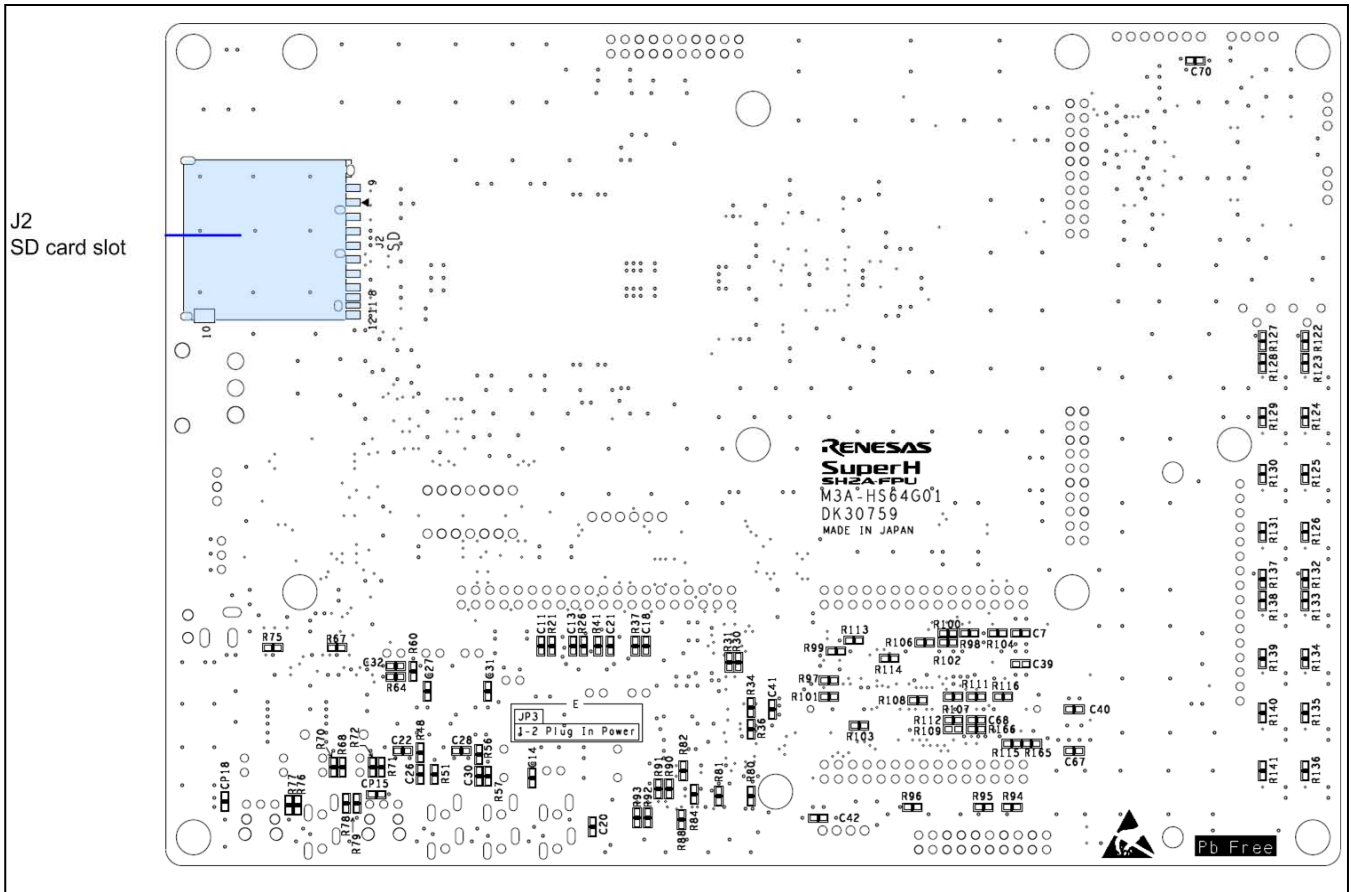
M3A-HS64G01 Connectors (Top View of the Solder Side)
